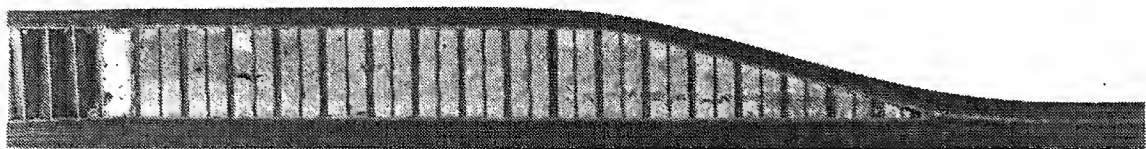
Longitudinal Panel Splice Core Close-out Manufacturing Demonstration (Chamfered Foam Filled Honeycomb with Fiberglass/Epoxy Overwrap).
